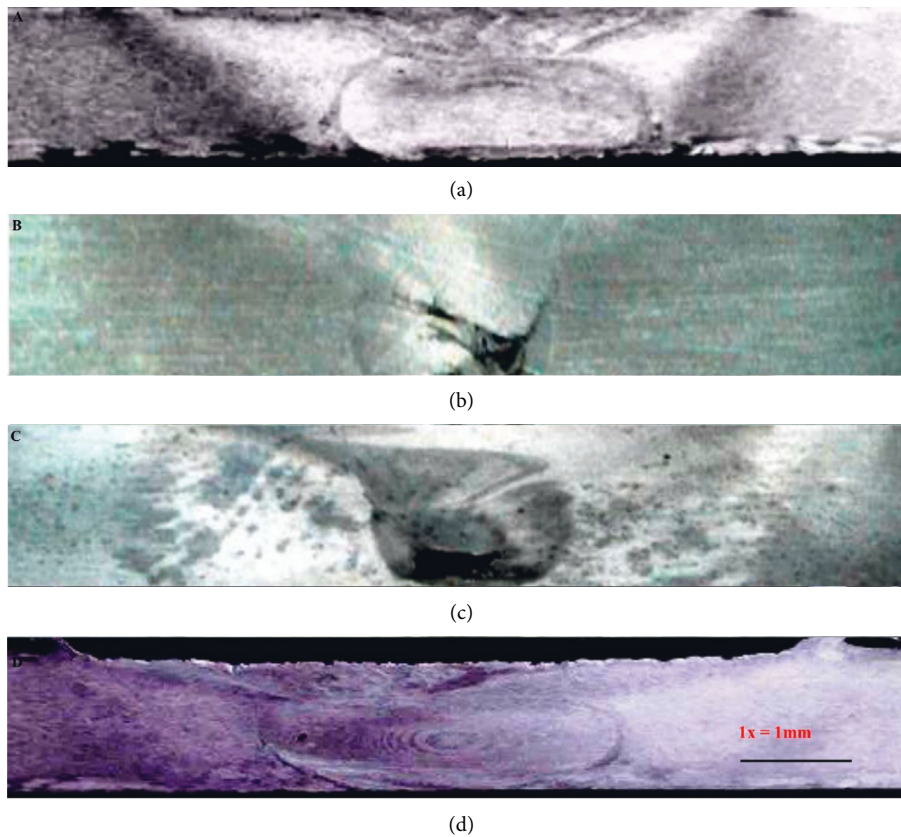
Macroscopic view of (a) weld at 0° tool angle, (b) weld at 1.5° tool angle, (c) weld with tunnel, and (d) distinct weld zones.
